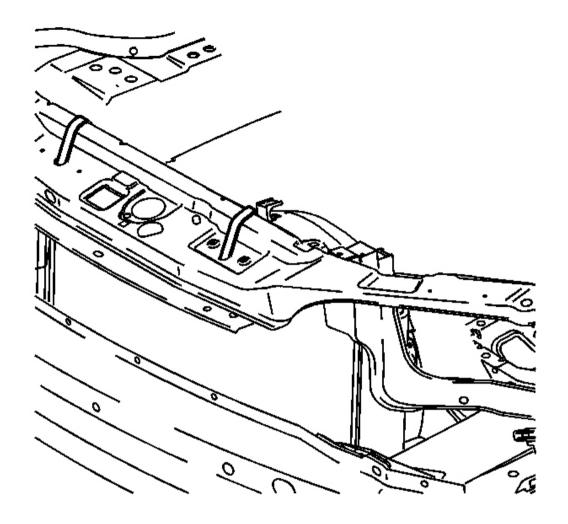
Radiator & Upper Radiator Support Courtesy of GENERAL MOTORS CORP.
